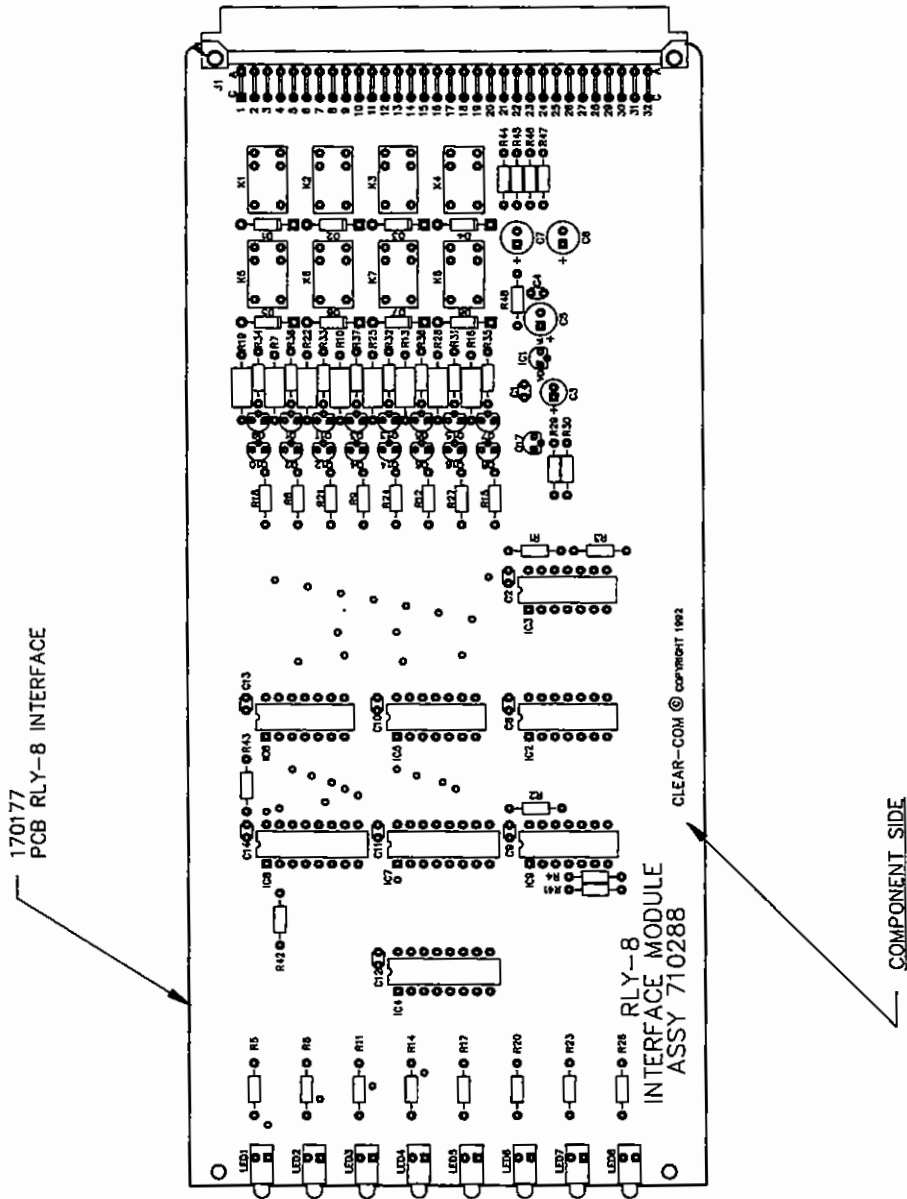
Assembly Drawing - RLY-8 PCB, Rev. b
